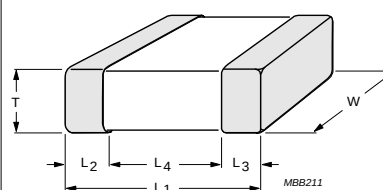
Surface mounted multilayer ceramic capacitor dimension
